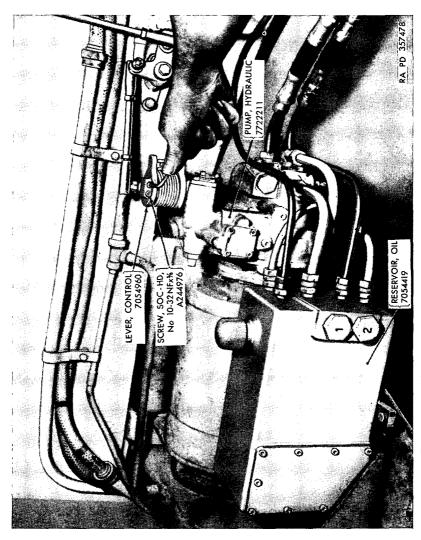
Adjusting hydraulic pump control shaft for neutral position.
